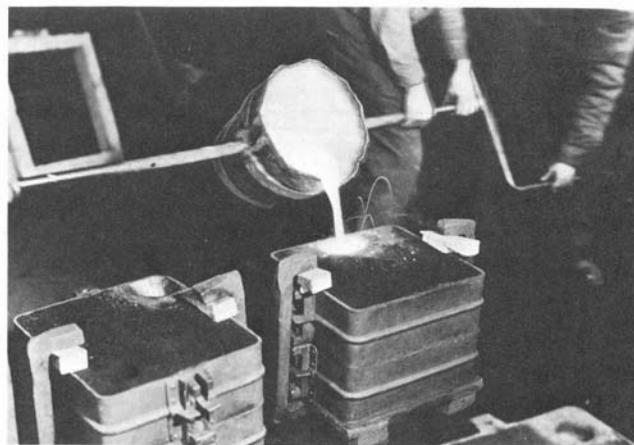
Pouring a mold from a shank-type ladle. (Courtesy Steel Founders' Society of America.)
